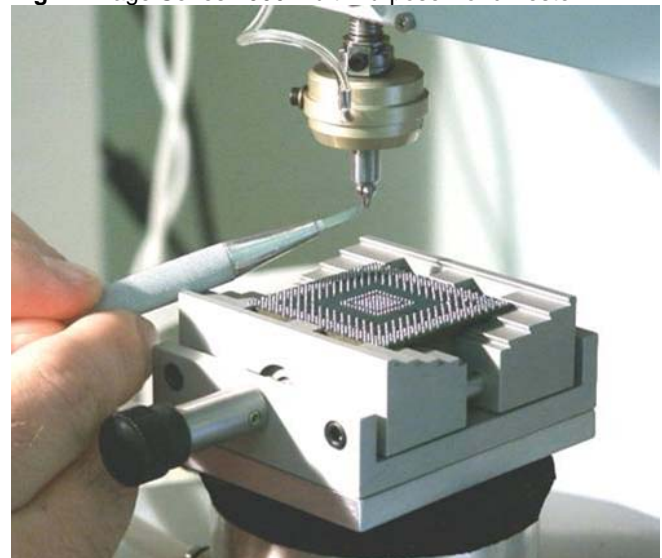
Detailed view of the solder ball pull device on the Dage Series 4000 Multi-Purpose Bond Tester
